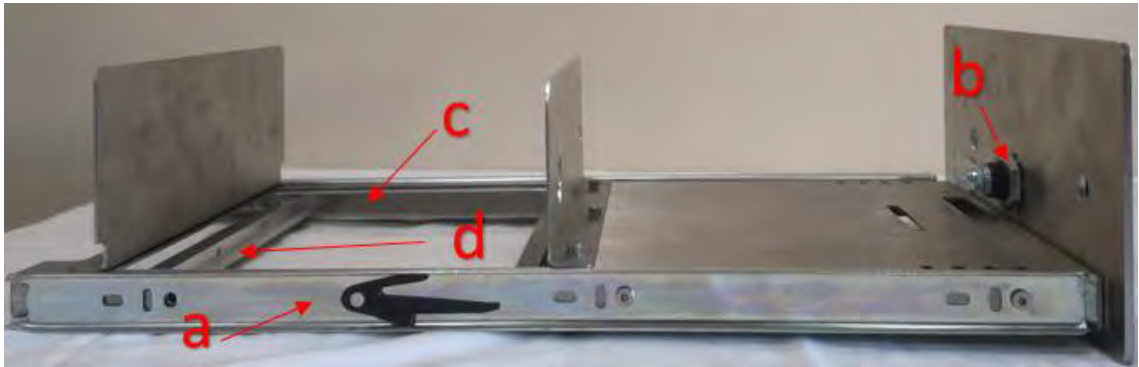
Drawer assembly: a) Slide rails; b) Lock latch; c) Jig mounting; d) Jig mounting 2
